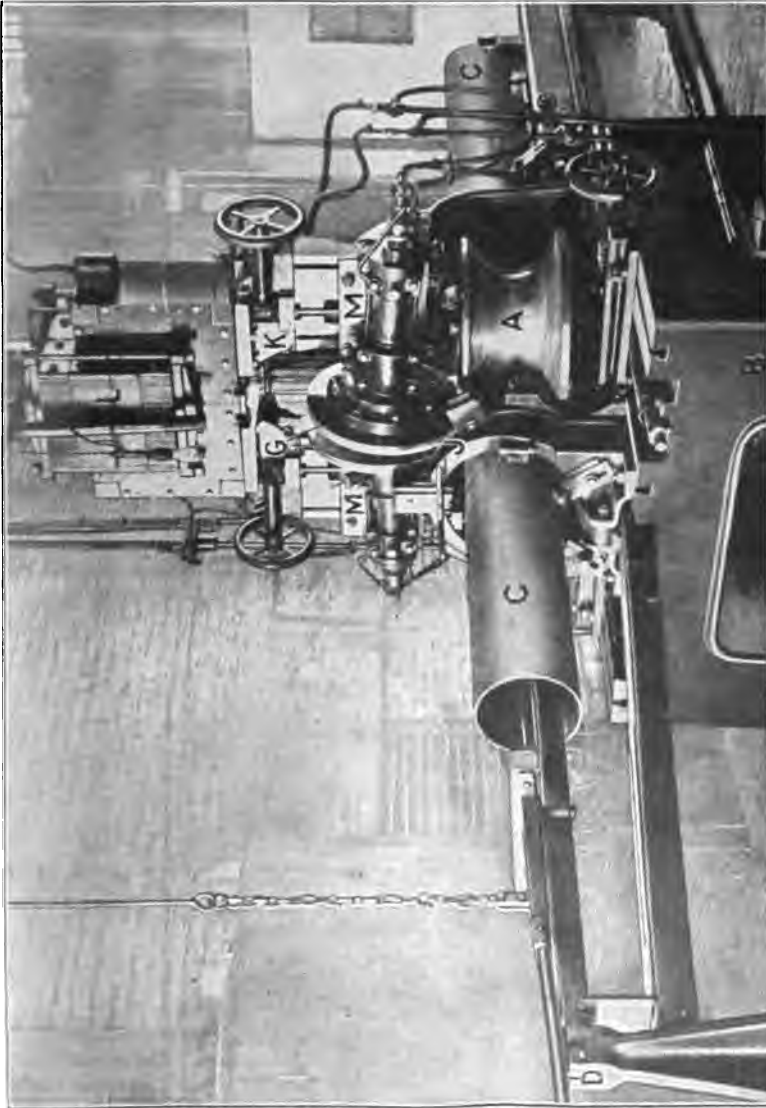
Electric Welding Machine for Tubes with Tube in Position
